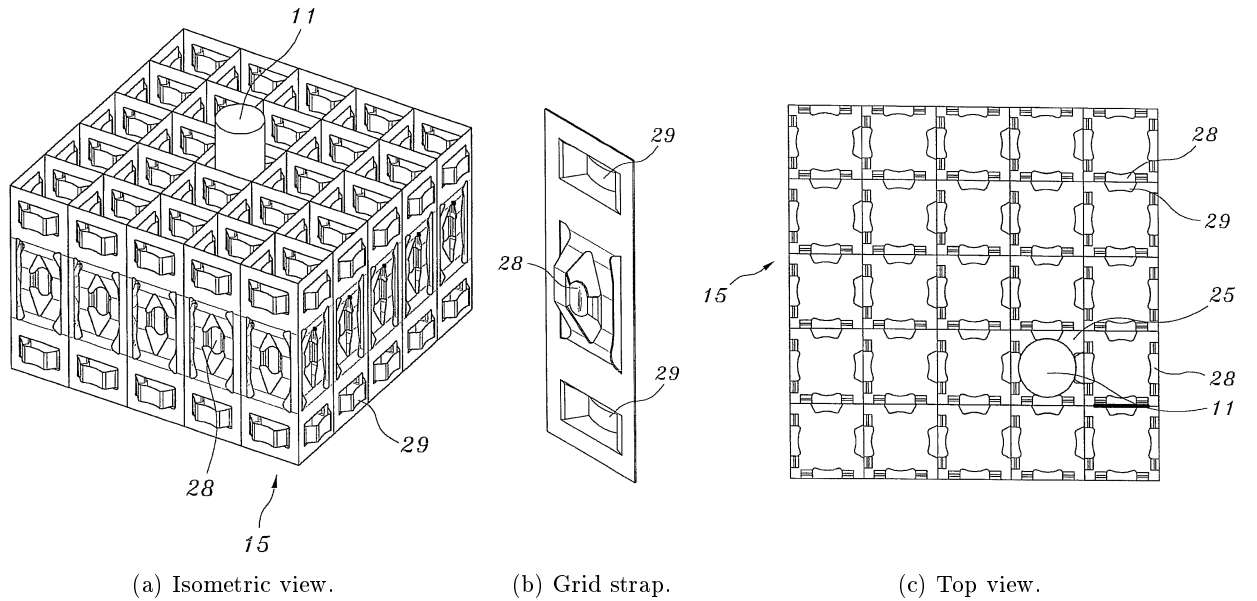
Views of a 5×5 section cut of the inner part of a spacer grid (Lee et al., 2014). 11: Fuel rod. 15: Grid strap. 25: Grid cell. 28: Grid spring. 29: Grid dimple.
